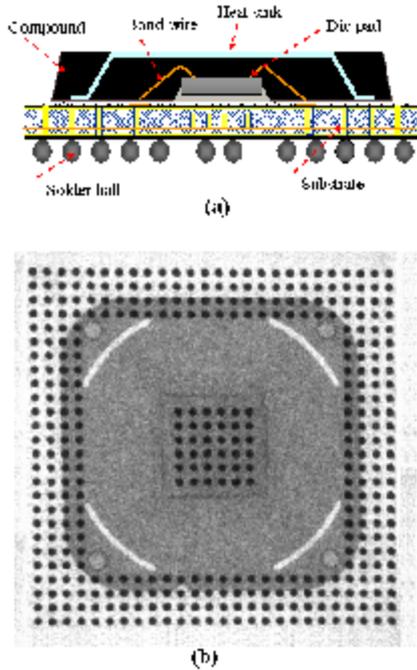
(a) Cross section drawing of EBGA package and (b) top view X-ray picture.
